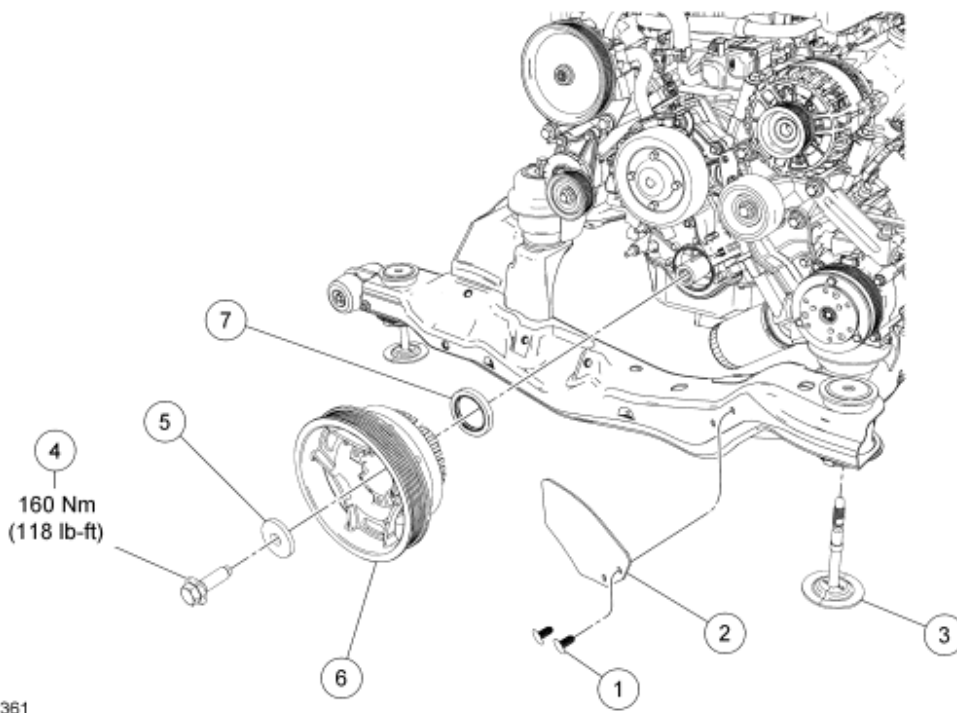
Exploded View Of Crankshaft Pulley & Front Seal (With Torque Specifications)
